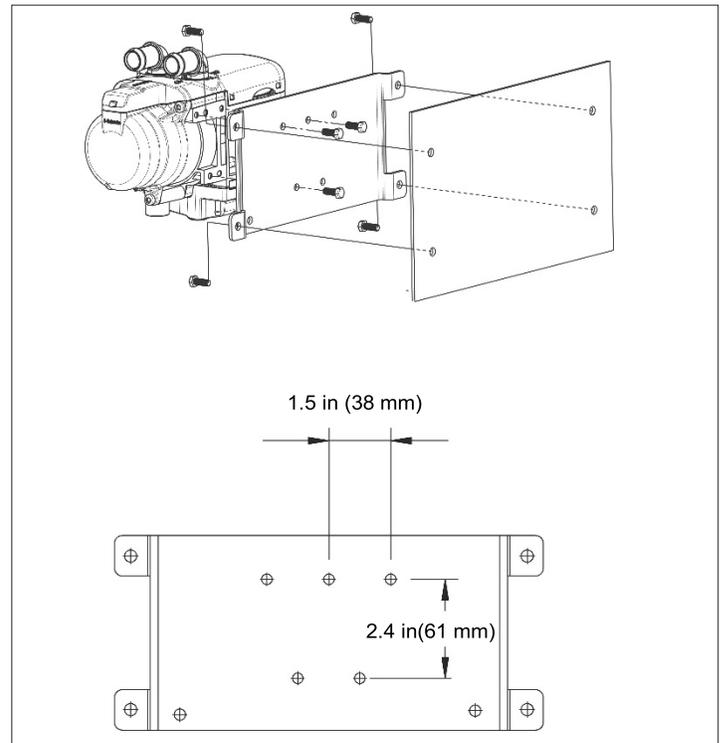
Thermo Top Evo Standard Bracket Exploded View and Dimensions
